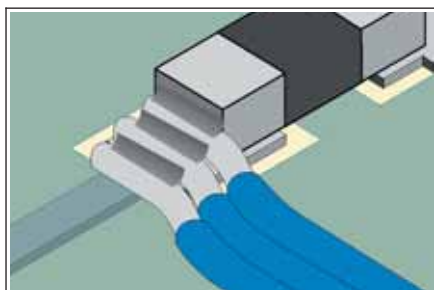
Not Recommended Multiple wires overhanging pad edge.
